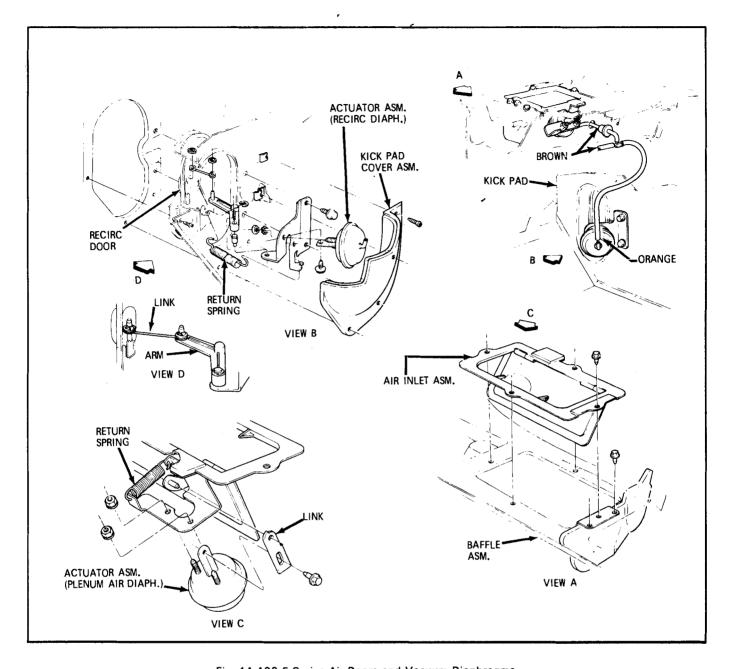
A-128 F Series Air Doors and Vacuum Diaphragms
